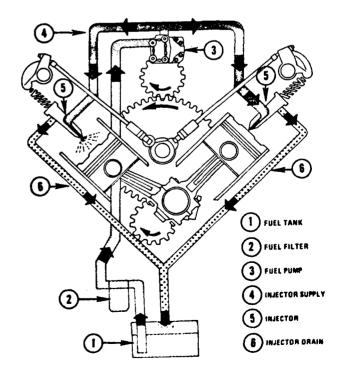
, (FWC-30). Fuel flow schematic - V Engine
